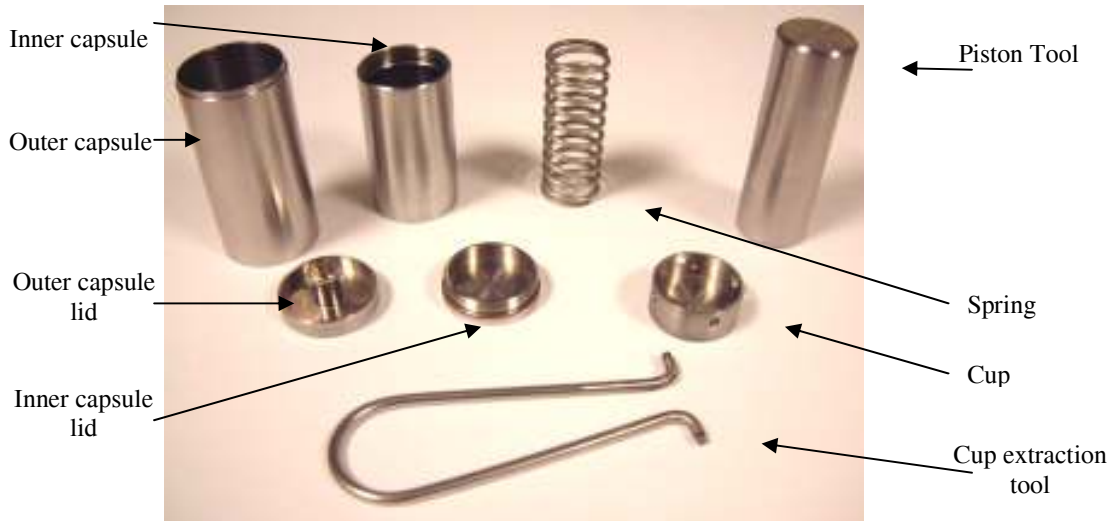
The AE4043/nn source components including the inner and outer capsule and lids, cup, spring, piston tool and cup extraction tool (excluding the spring locators).
